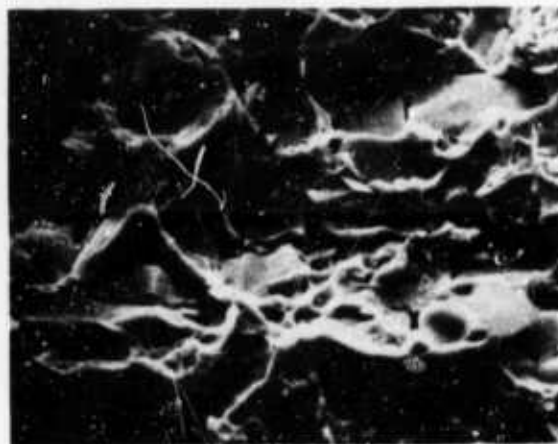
SEM micrographs, fracture surfaces, I-718 STDA, tested at RT (6411), 1100 X
